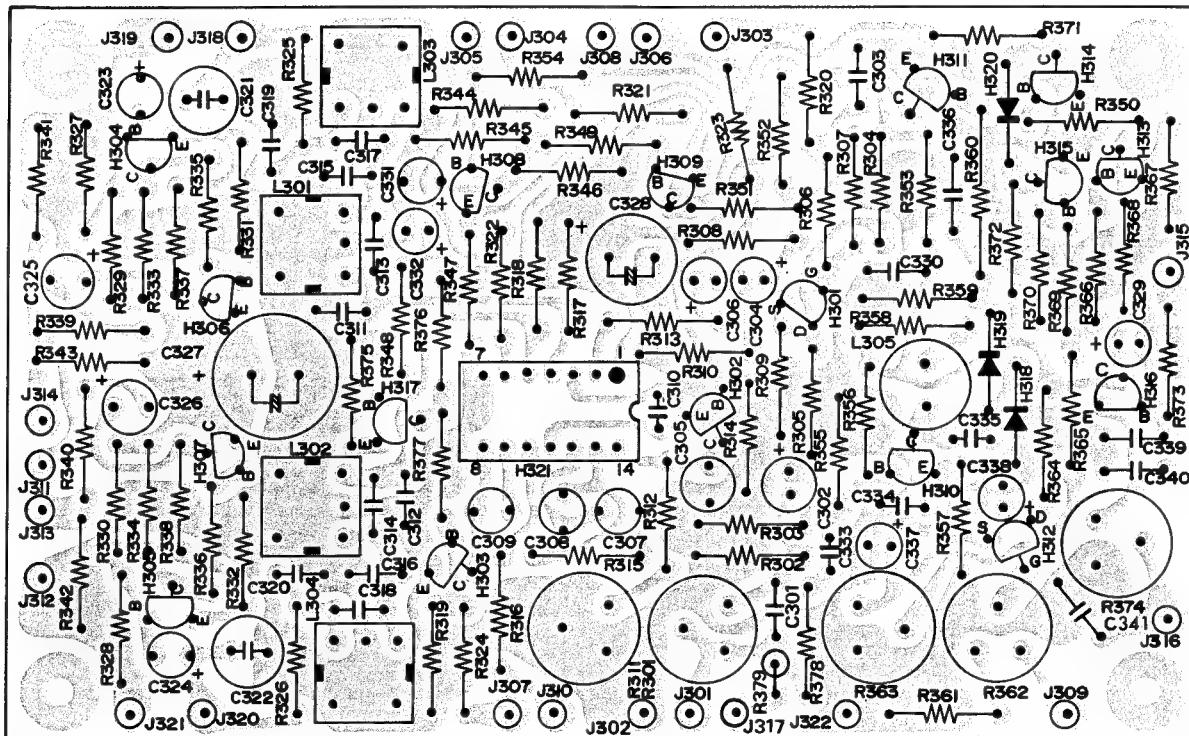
MPX Stereo Decoding Amplifier Assembly P300 Component Locations
